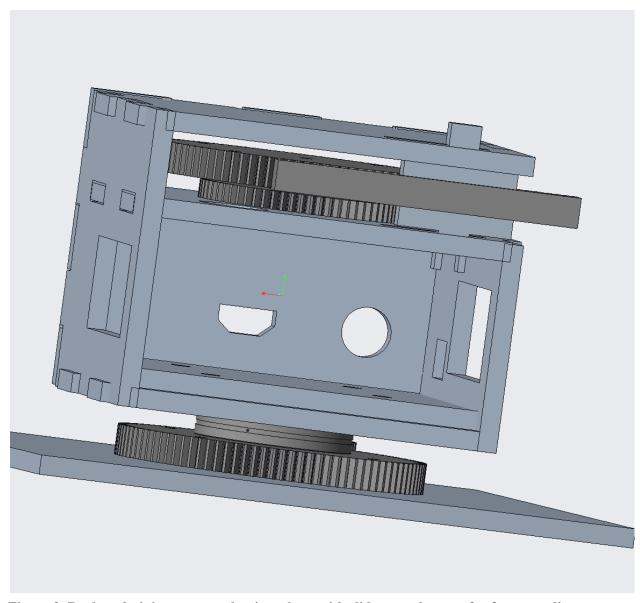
Rack and pinion gear mechanism along with slider attachments for focus toggling.
